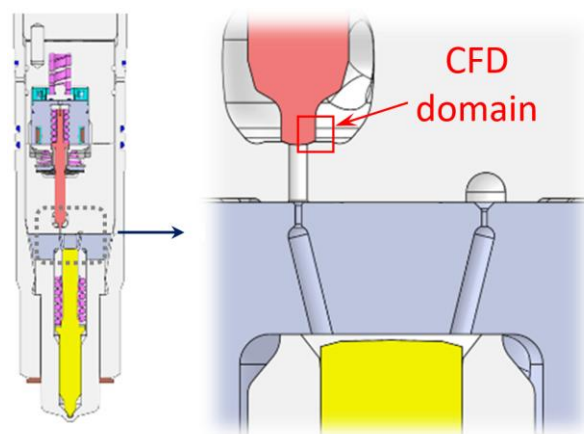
Cross section of piston and seat of a control valve for electronically controlled diesel injectors.
